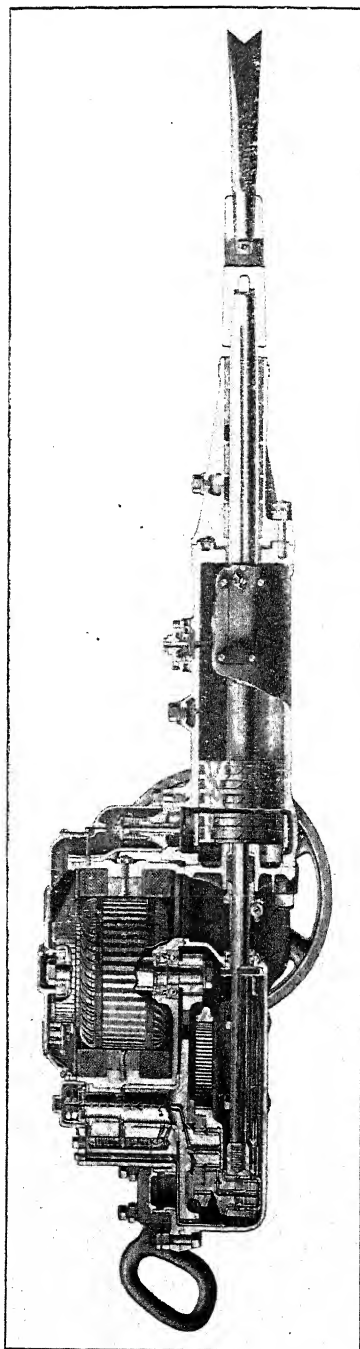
PNEUMOELECTRIC MACHINE, SECTIONAL VIEW.
